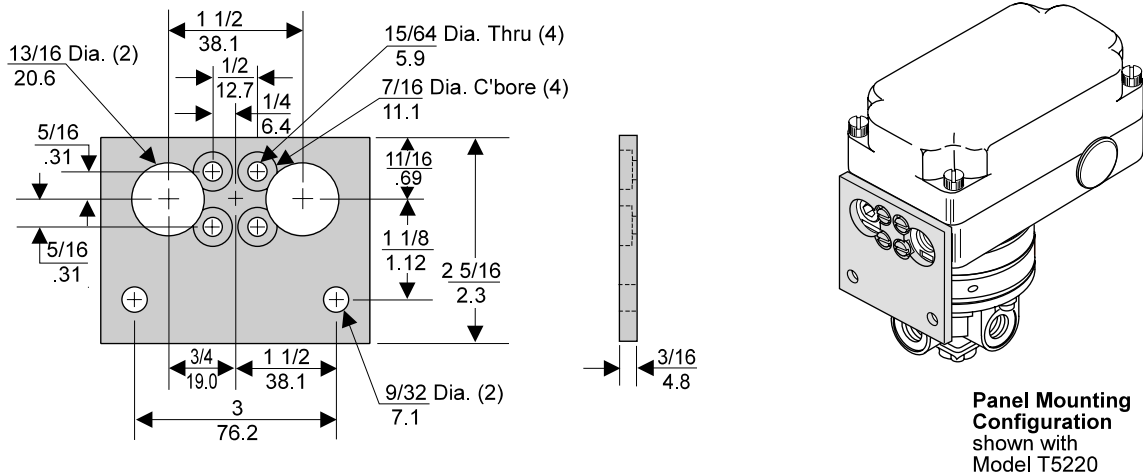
Mounting Kit EA-15268 shown with Model T5220. (Sold Separately)
